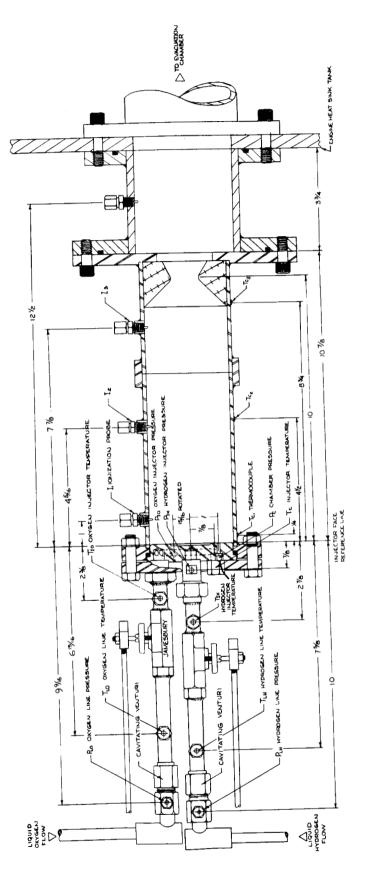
INSTRUMENTED ENGINE ASSEMBLY
